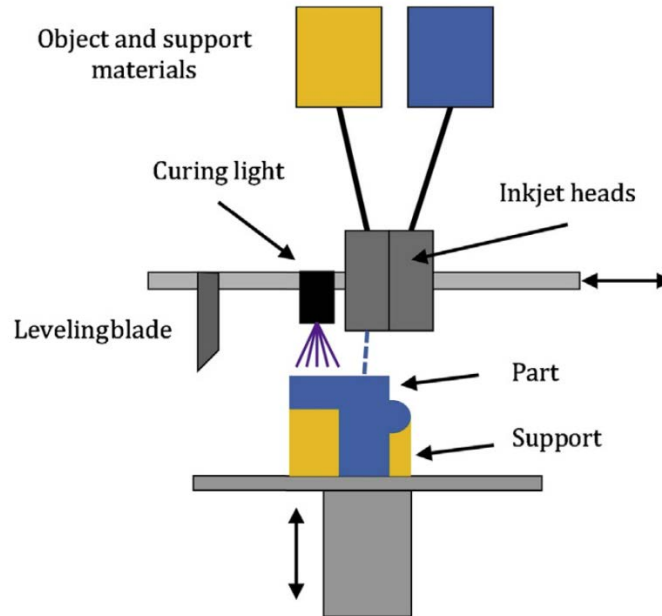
Material jetting/Binder jetting 3D Printing method [13]
